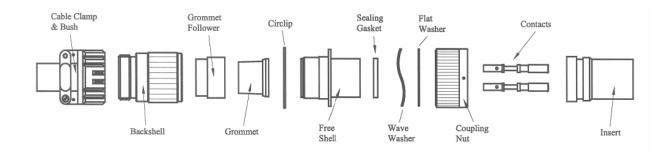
Exploded View of a Typical 'Plug' Connector
